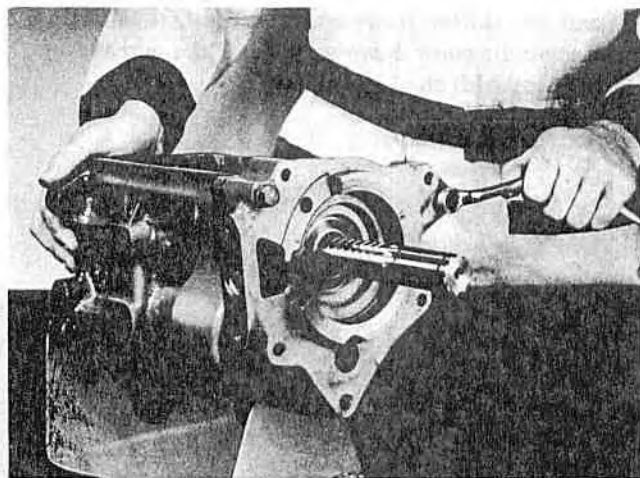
Tightening the Adapter Plate to Transmission Case Cap Screws
